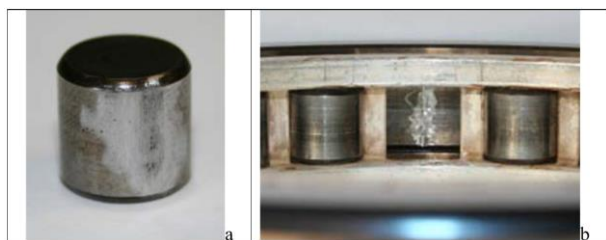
Bearing damage form: a - rolling element, b - internal race
